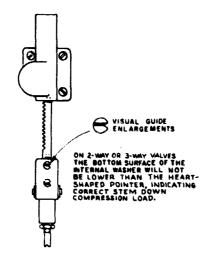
Properly assembled linkage will have the visual guide in the position shown.
